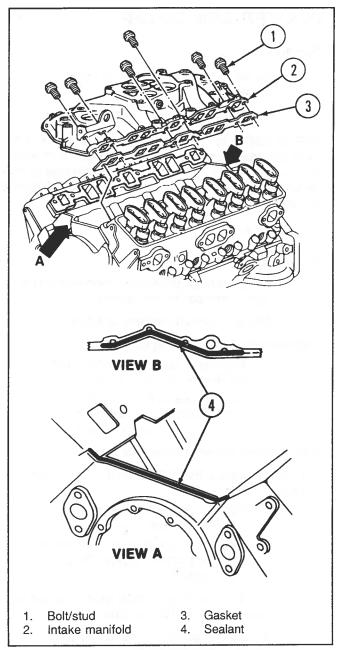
Applying Sealer And Gaskets To Heads For Intake Manifold
